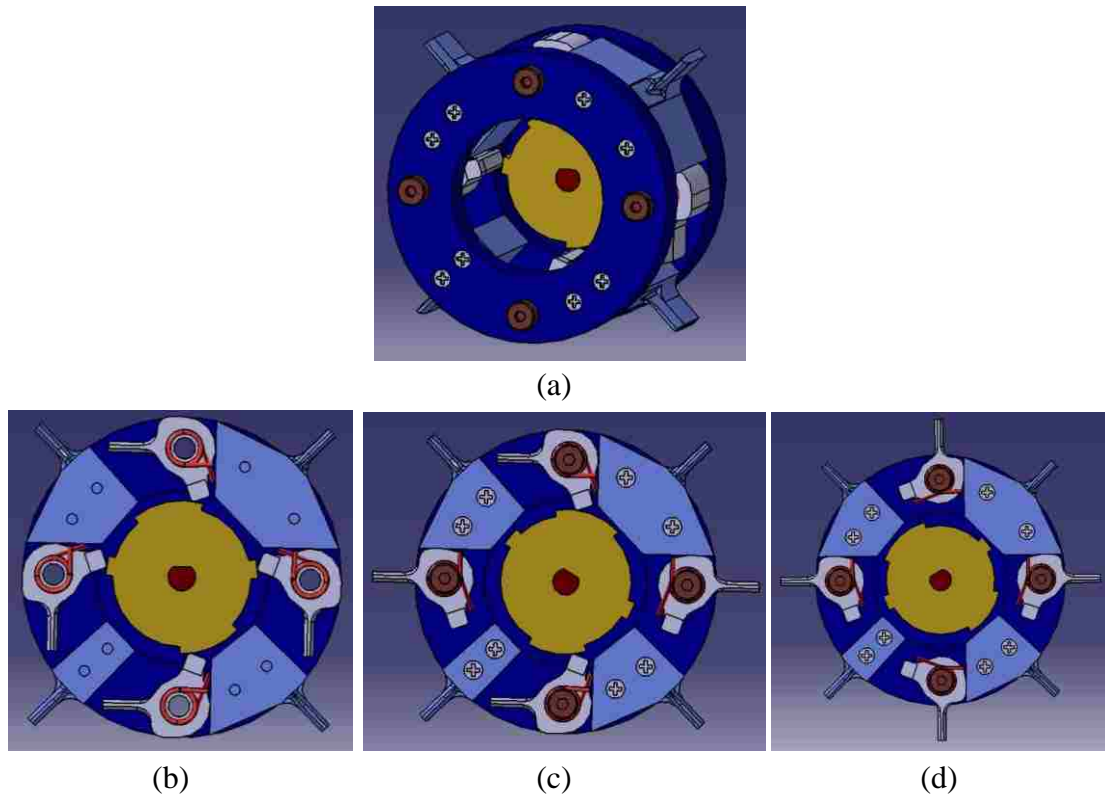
CAD model of the rotary switchblade adaptive cutter design. Front views with cover plate removed showing adaptor position for (b) 4 blades. (c) 6 blades. (d) 8 blades.
